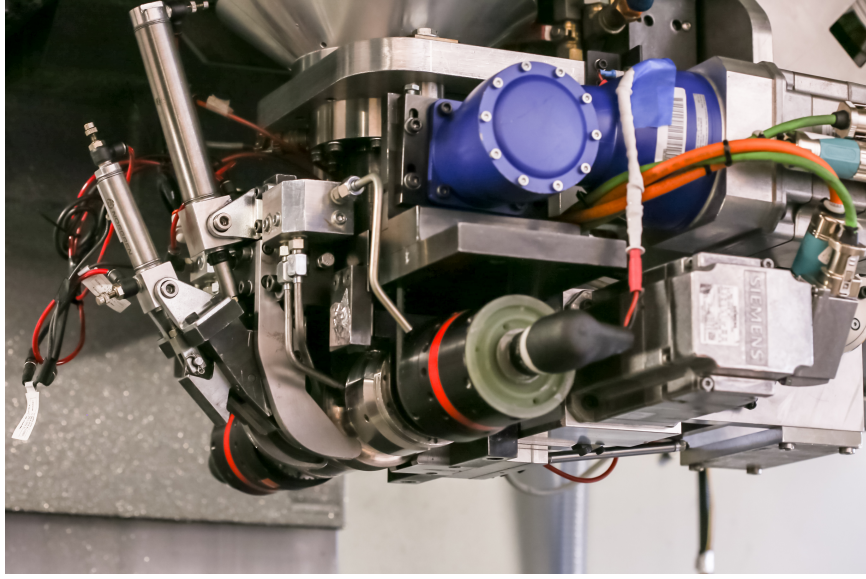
UAM Weld assembly in CNC machine
